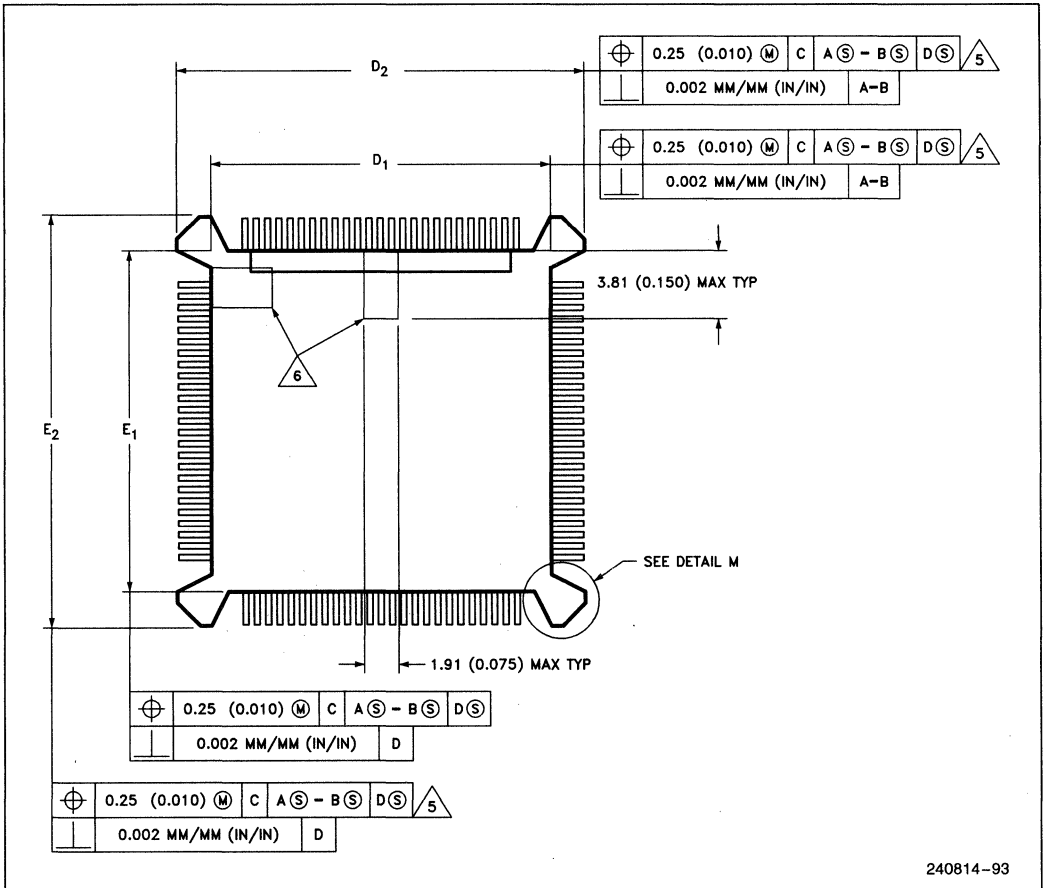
Detailed Dimensions of the 82360SL I/O in the 196-Lead PQFP—Molded Details
